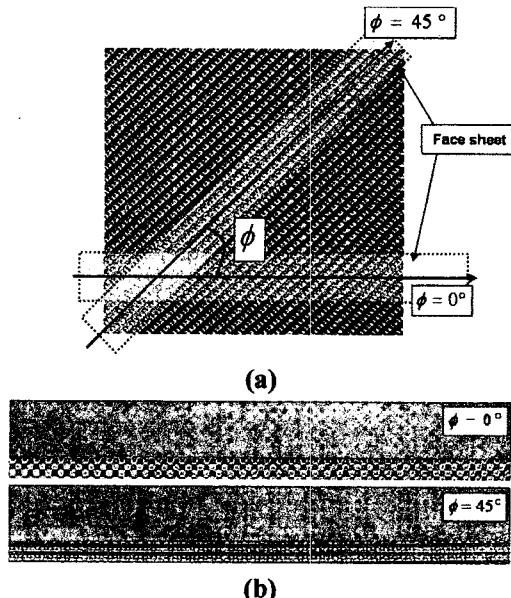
Sandwich plates with inner dimpled shell structure a) Definition of pattern angle (ϕ) b) Specimens of 3-point bending test (20mm X 160mm)
